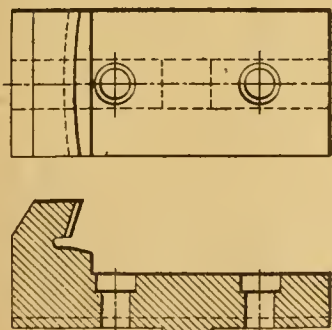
For holding bevel gears, etc. The jaws are made to conform to the bevel on the gears.
